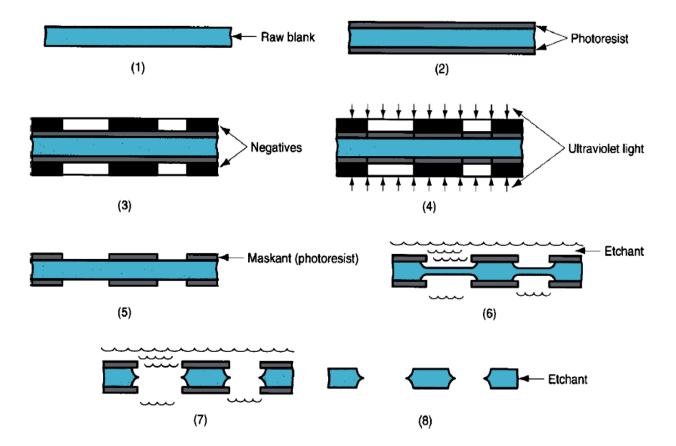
photochemical machining (PCM): it is employed in metalworking when close tolerances and/or intricate patterns are required on flat w.p. PCM are also used extensively in electronics industry to produce circuit designs on semiconductor wafers.
